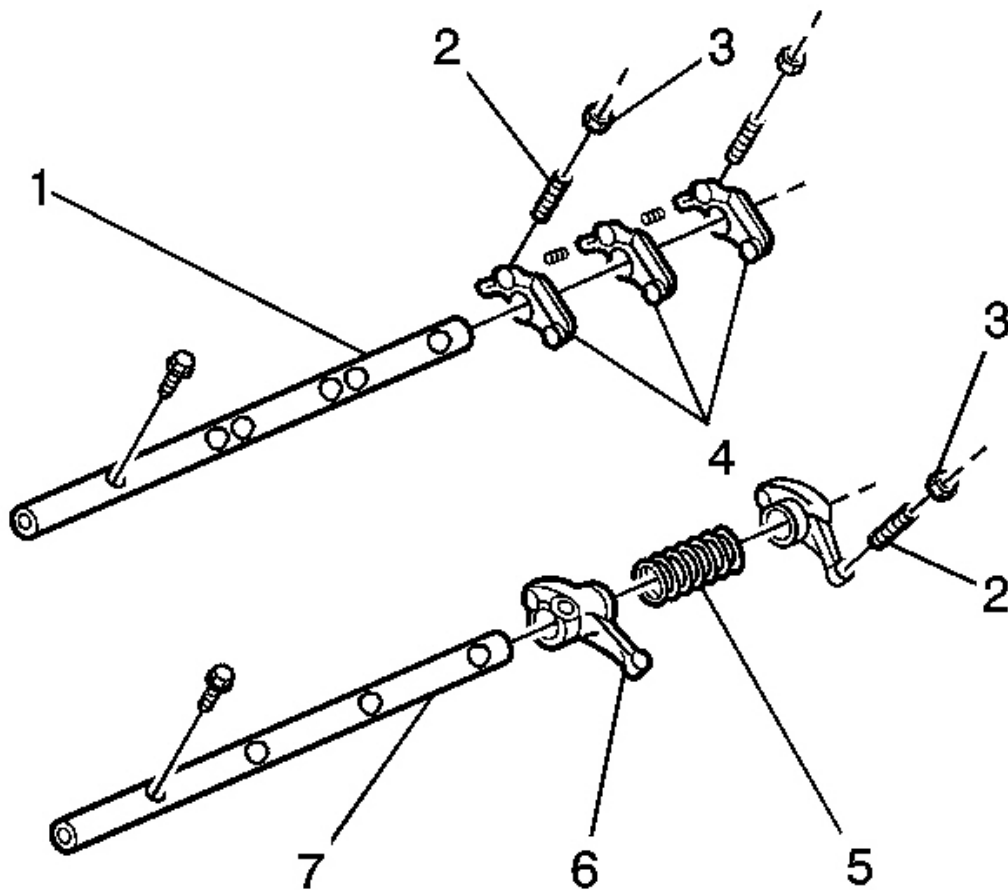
Exploded View Of Intake Valve Rocker Arms
